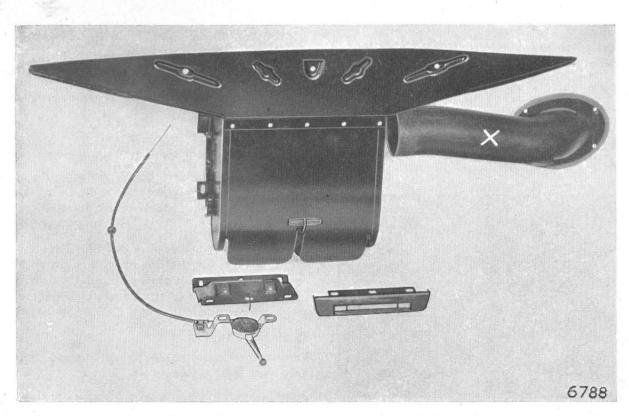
Heater assembly, control and air inlet pipe "X" (if fitted)
